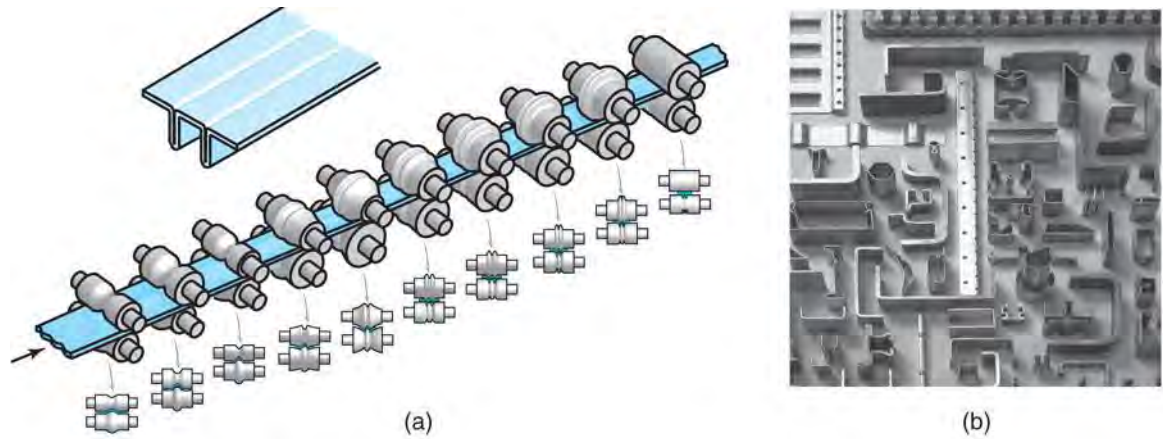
(a) Schematic illustration of the roll-forming process. (b) Examples of roll-formed cross sections. *Source:* (b) Courtesy of Sharon Custom Metal Forming, Inc.
